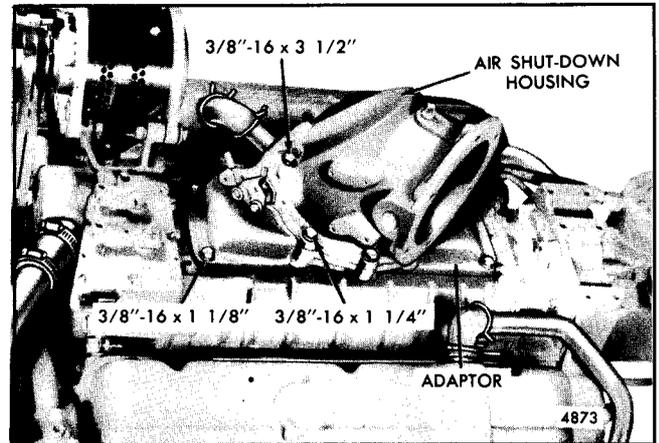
Location of Air Shutdown Housing and Adaptor Mounting Bolts (8V-53 Engines)
